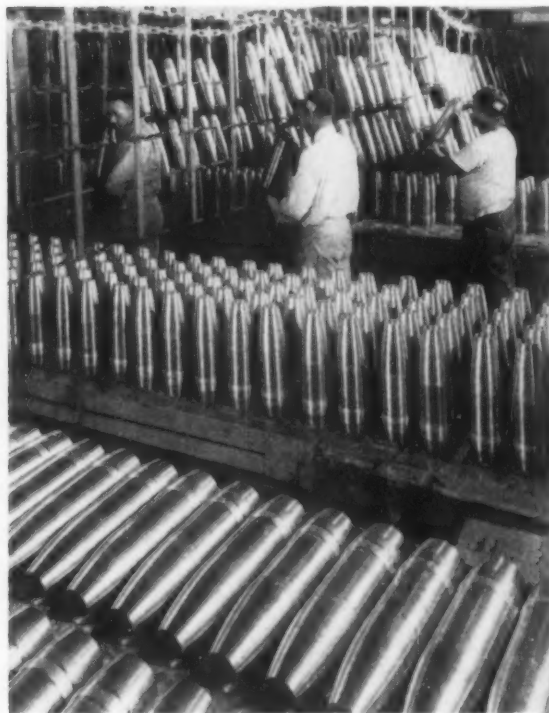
After inspection by Ordnance, shells are transferred from belt-type conveyer to hooks for movement through wash and Bonderizing machine.
